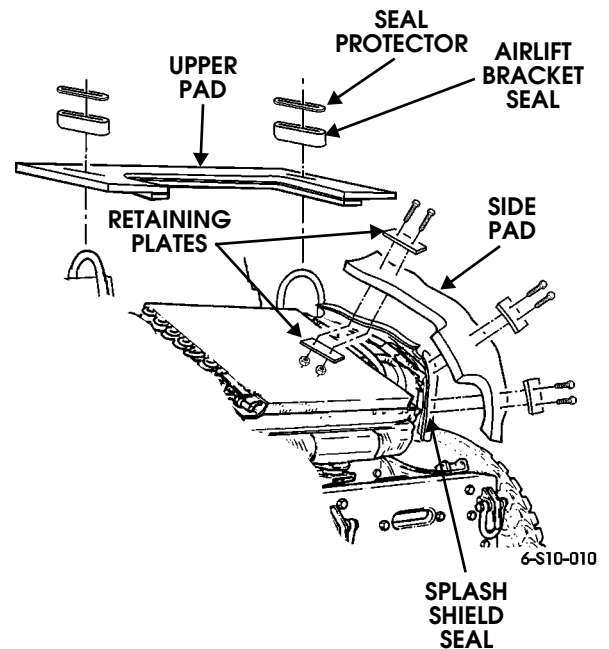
Foam Pad Mounting (Turbo Diesel)
